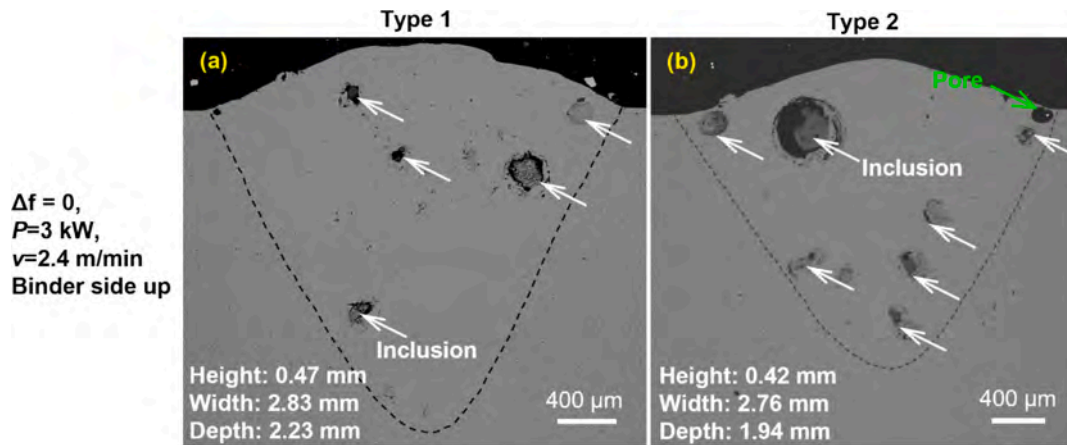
Cross-section morphologies of the MAPS-tracks using Type 1 and Type 2 powder sheets. (a) Experiment No. 4 ( $\Delta f = 0$ , 3 kW, 2.4 m/min, Type 1, binder side up); (b) No. 7 ( $\Delta f = 0$ , 3 kW, 2.4 m/min, Type 2, and binder side up).
